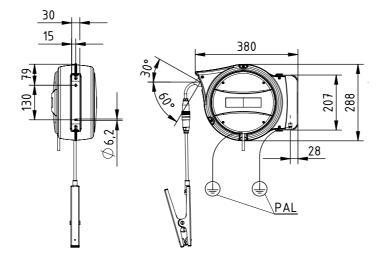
Aluminum cable rewinder Typ 601KR/AW
